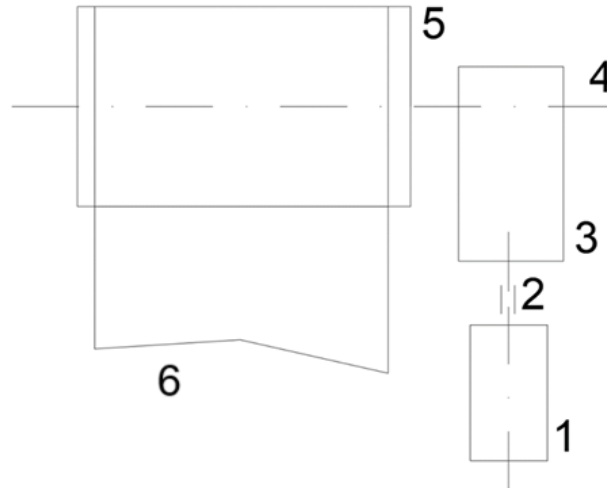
Conveyor belt drive diagram: 1 – electric motor, 2 – coupling, 3 – gearbox, 4 – drive drum shaft, 5 – drive drum, 6 – conveyor belt
